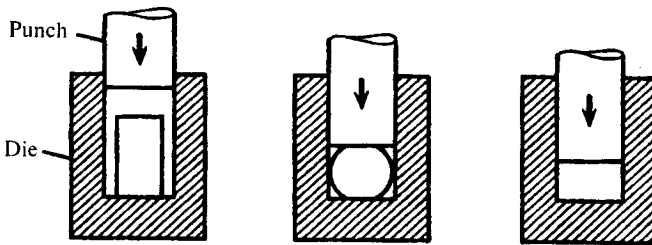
Closed die forging is a special form of impression die forging that does not depend on flash formation to complete die filling. As shown here, the die impression is completely closed to external metal flow.
